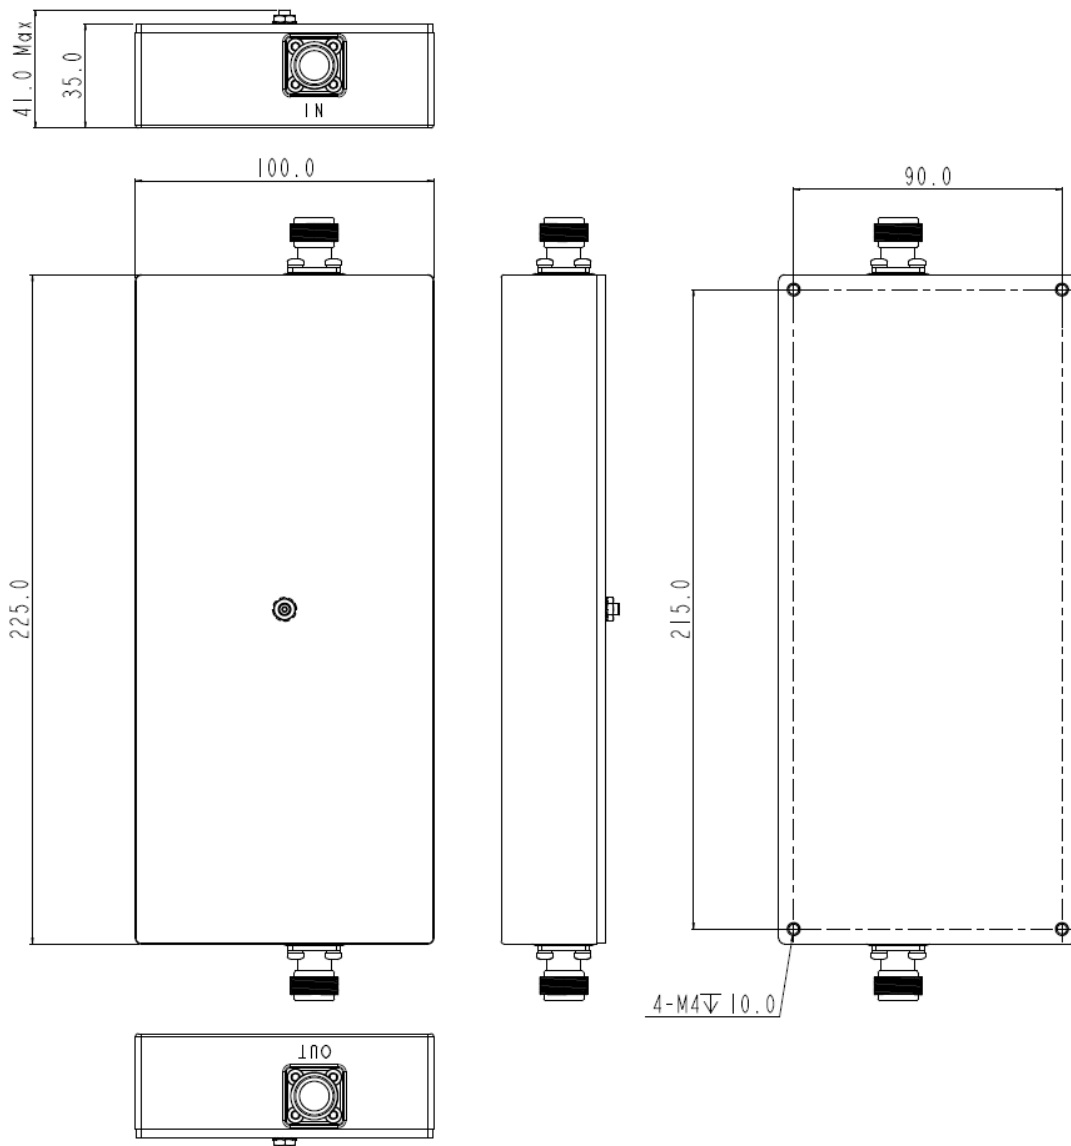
JX-CF1-2180M2300M-60N front panel layout
